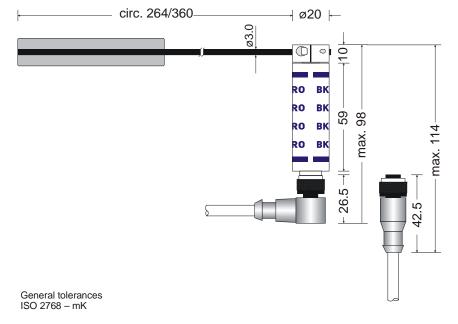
Mechanical Dimensions – Scanner TK8A
